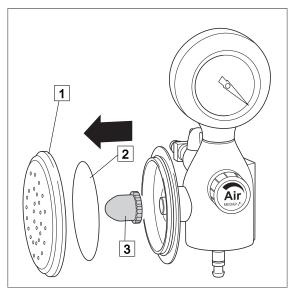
Disassembly of FINA AIR B 800 / FINA AIR P 350
